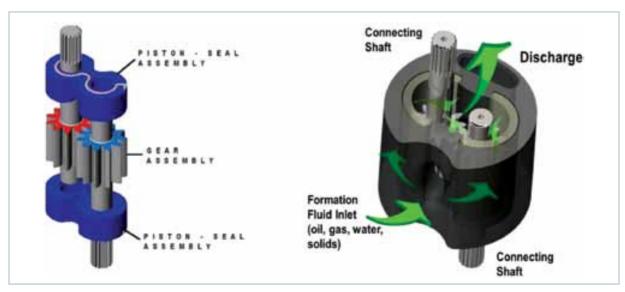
Rotary Gear Pump Stage illustrating Flow Profile
